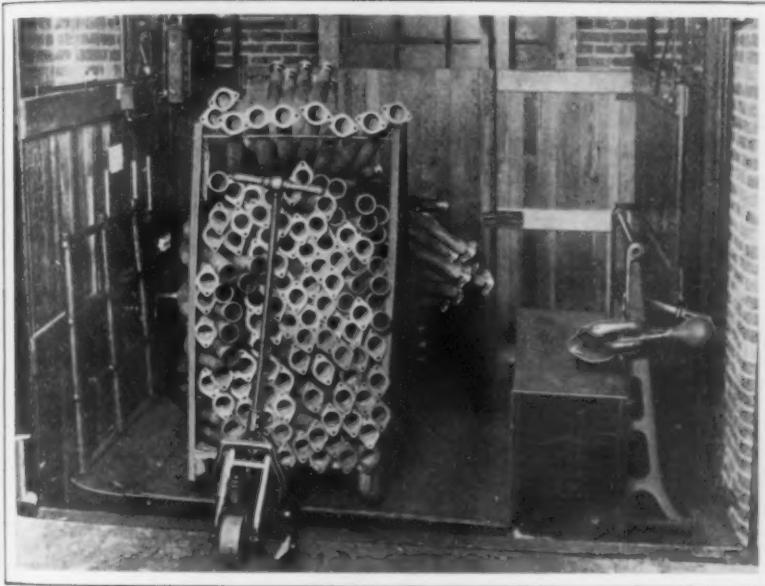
For Transporting Materials Between Floors, the Elevator with the Electric Truck May be Stopped to Bring the Truck Platform Level with the Factory Floor
